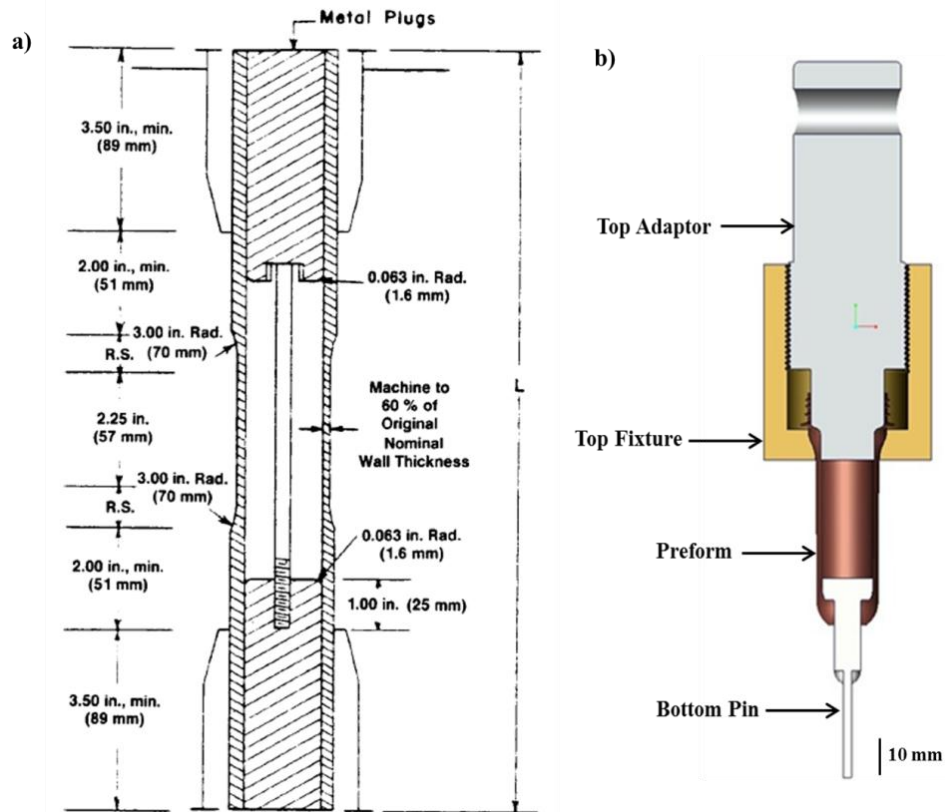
a) ASTM D638 Standard Test Setup Specifications[127] b) Cross Sectional CAD Model of Custom Fixture.
